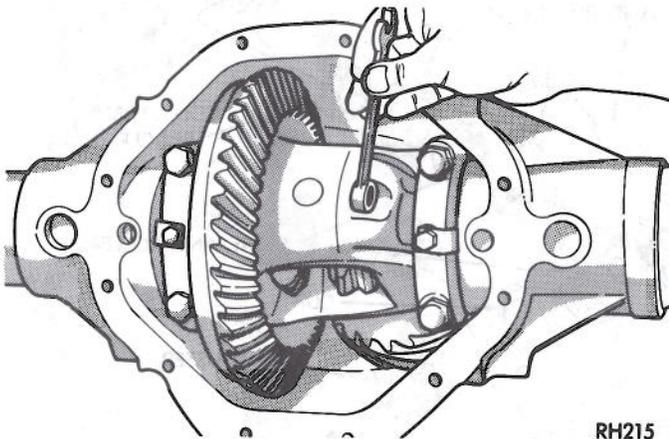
Removal or Installation of Differential Pinion Shaft Lock Pin
